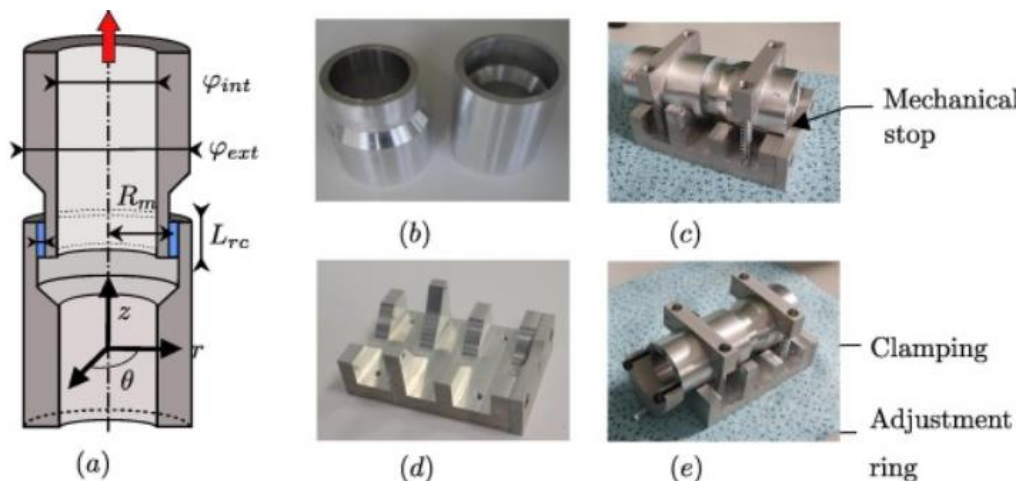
Tubular sample (a) schematic view cut and dimensions (b) aluminum substrates (c) adhesive bonding set-up (d) and (e) clamping and adhesive length control.
